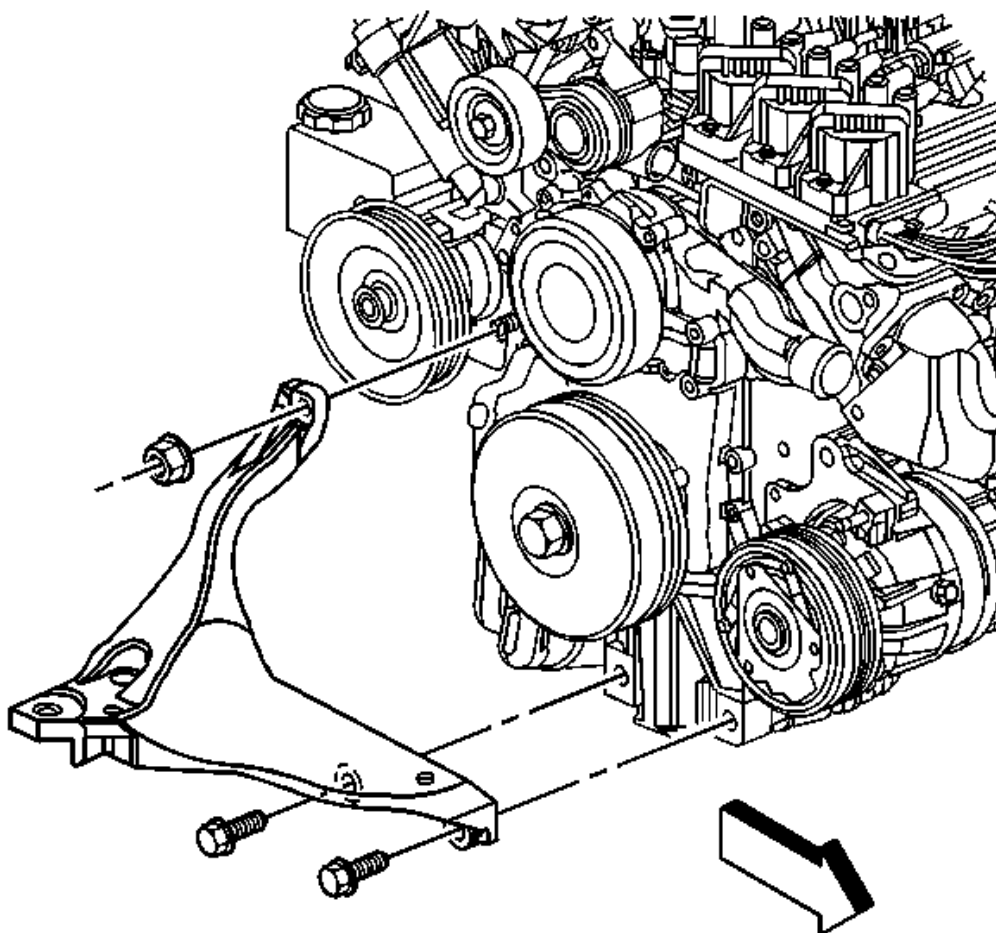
View of Right Engine Mount Bracket, Stud, & Fasteners
